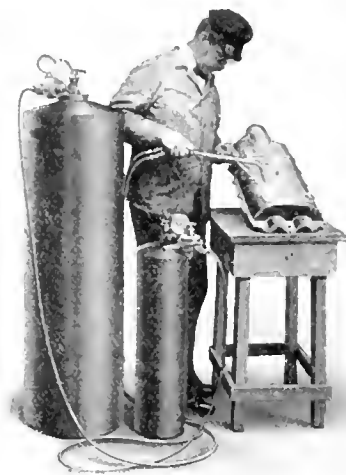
Simple and Inexpensive Equipment for Autogenous Welding in Small Plants
